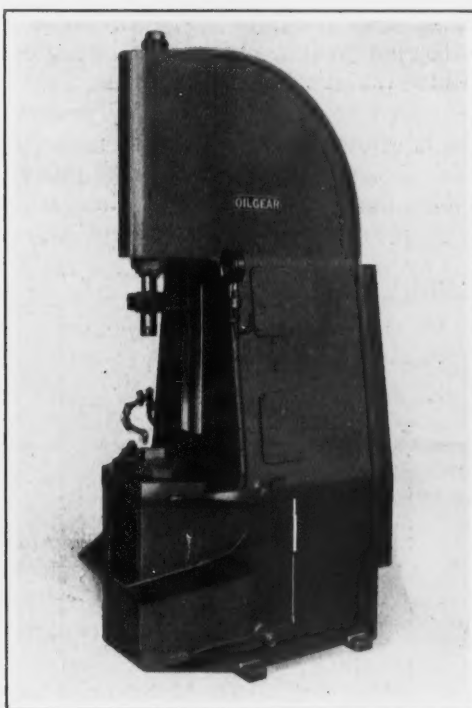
Welded Machine Designed for Same Purpose as Equipment Shown in Fig. 2. Note Improved Appearance Obtained by Enclosing Working Parts
